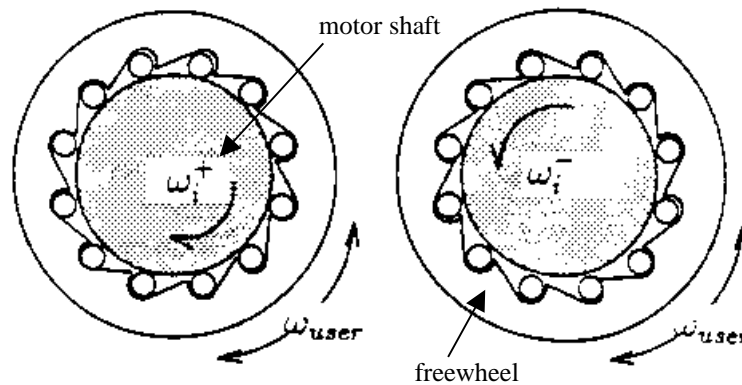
PADyC's clutching mechanism. (Drawing taken from [8]).
